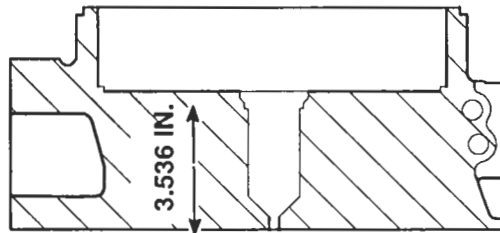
Minimum Distance Between Top and Bottom Faces of Cylinder Head
